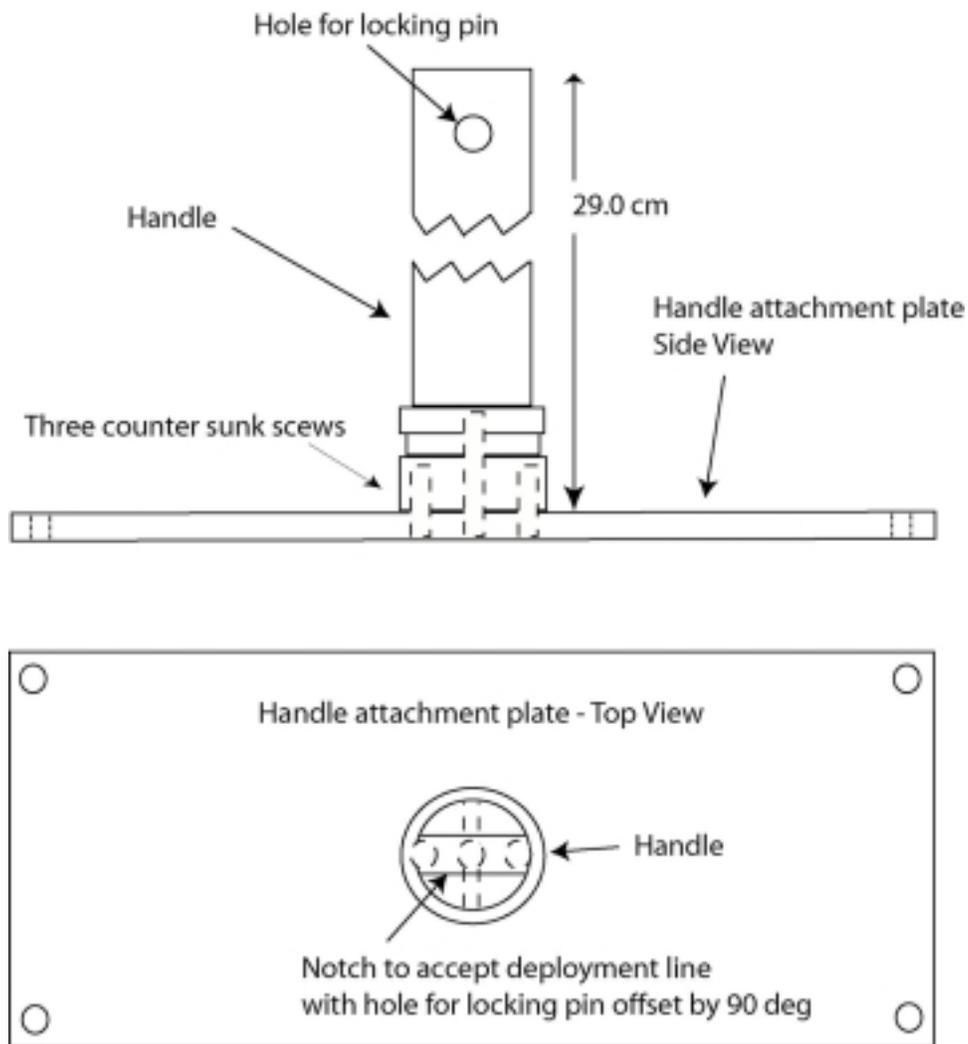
Handle attachment plate shown in two views, downward looking and side view. The screw hole pattern in the handle attachment plate matches the screw configuration of the sampler body. The notch to accept a deployment line is shown as is the hole to accept a locking pin. Note the hole is offset by 90 deg to the notch. Three countersunk Phillips head screws are used to attach the handle to the plate.
